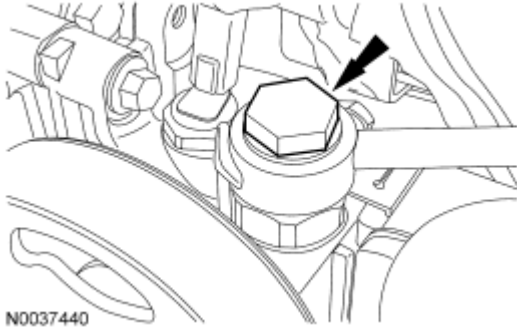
Locating Power Steering Pressure (PSP) Tube Bolt
